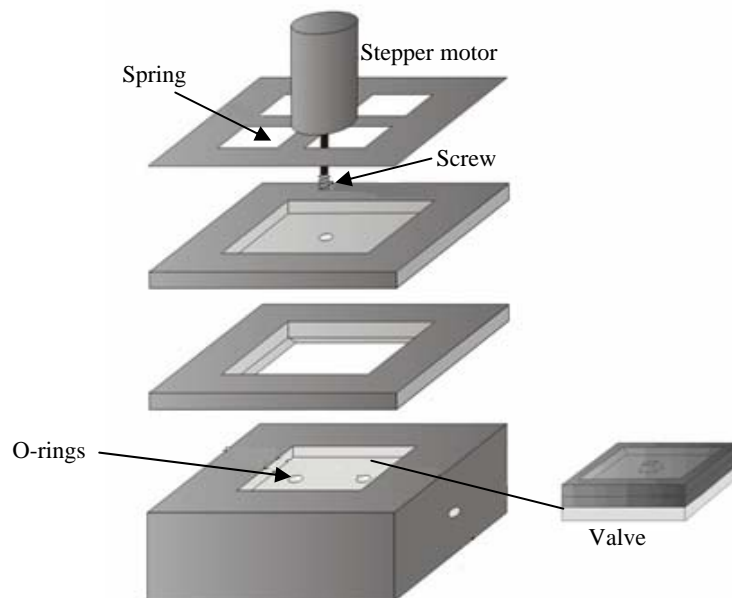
Clamping set up for the valve. It is placed on the O-rings in the metal block and then clamped with stepper motor on the top of it.
